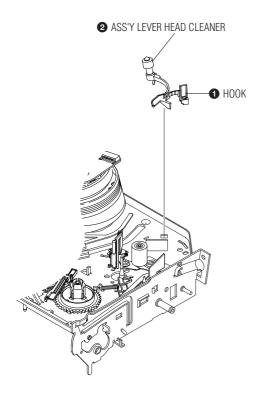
Ass'y Lever Head Cleaner Removal
